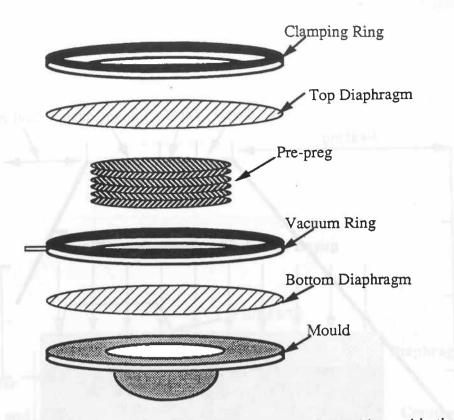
(a) Exploded view of a typical mould and layup assembly used in the diaphragm forming process. (courtesy of M. Monaghan [1])
